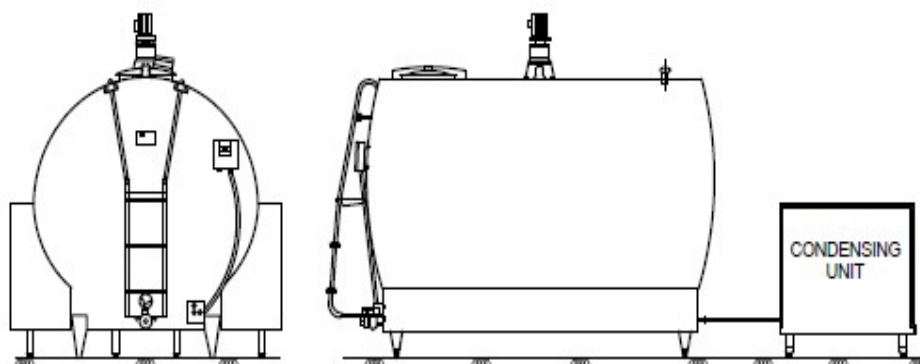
B CLOSED TYPE BULK MILK COOLING TANK
